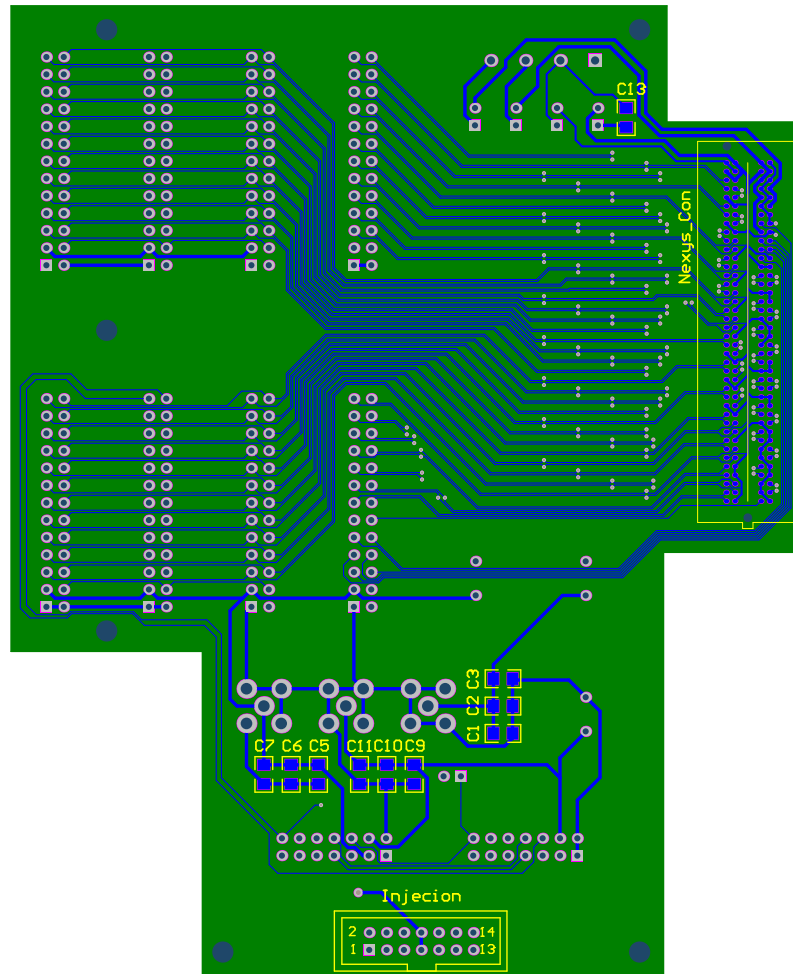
Bottom side layout of the Multi-purpose Adapter Board. It connects to the FPGA board by a LPC-FMC connector on the right side. On the lower edge, an InjectionBoard can be plugged in.
